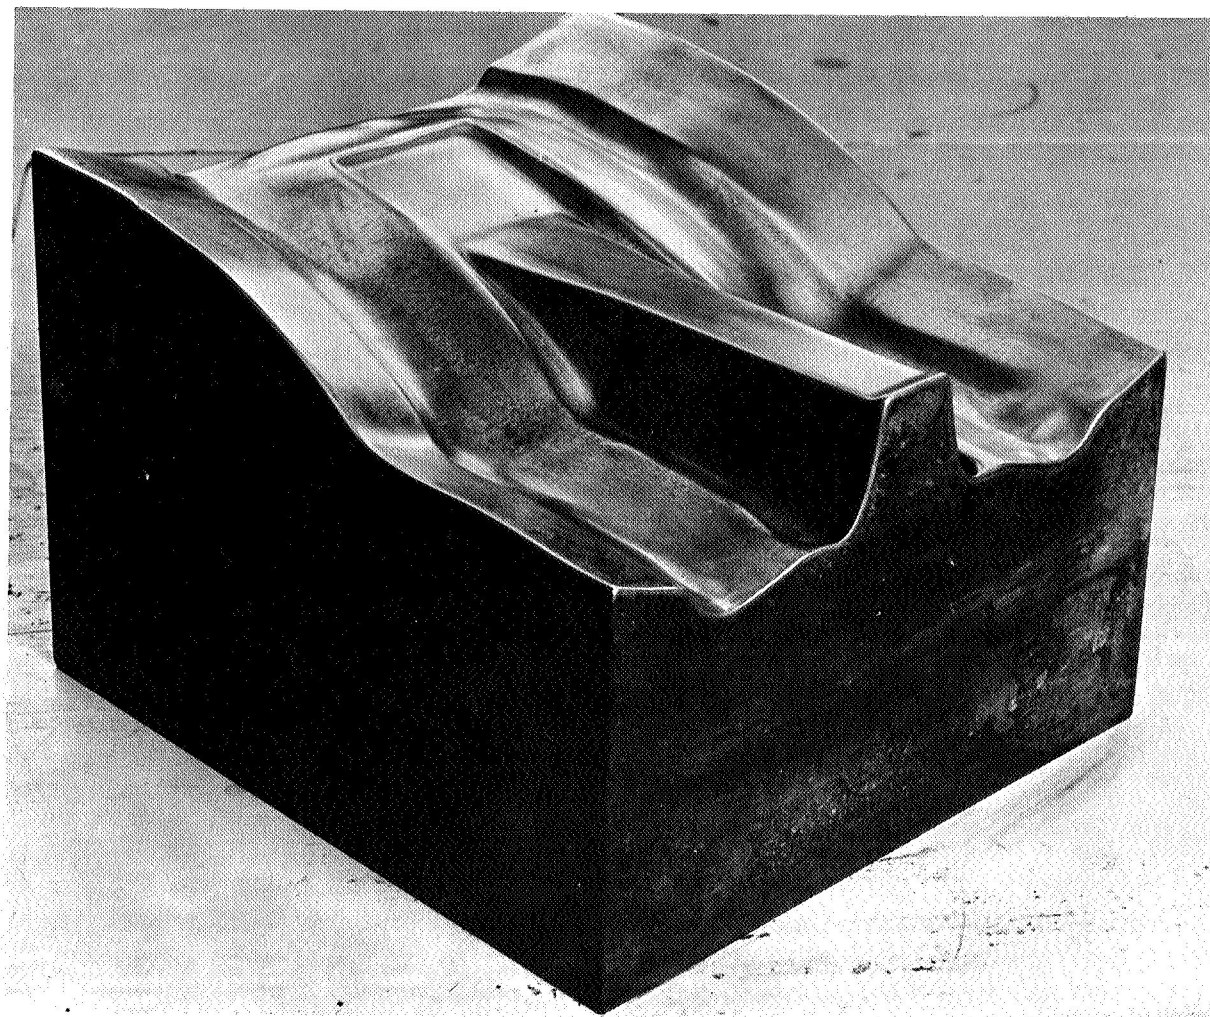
ECM SINKING OF FORGING DIE FROM SOLID BLOCK (REF. 95)
